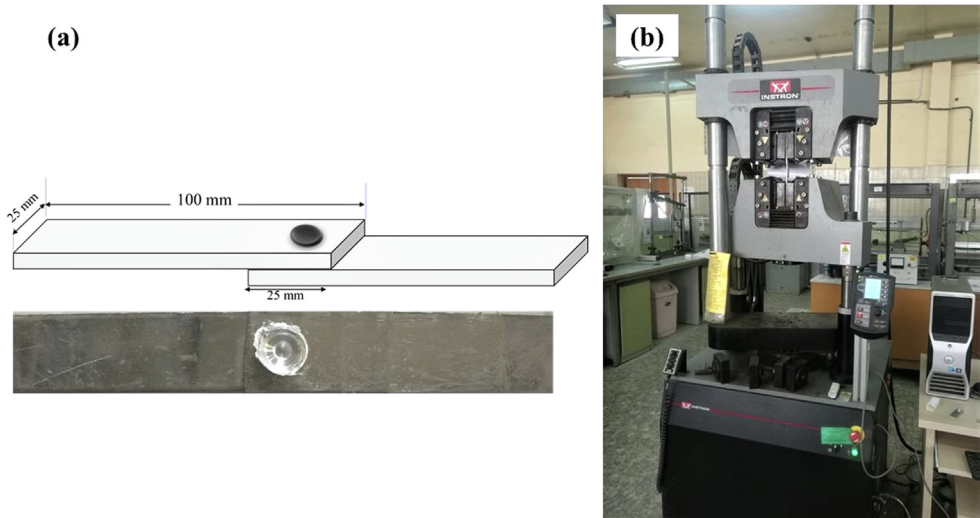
(a) FSSW specimen dimensions, (b) INSTRON 600DX universal tensile machine.
